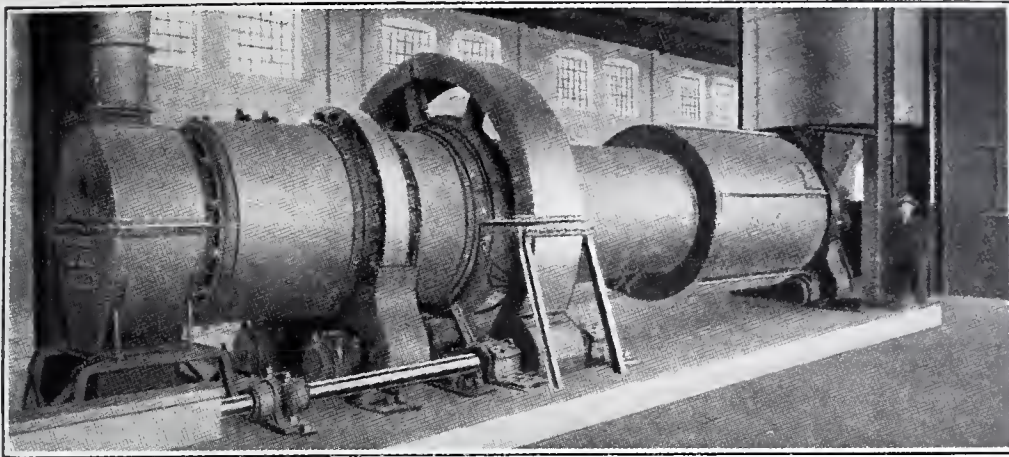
POLYSIUS COMBINATION SOLO BALL AND TUBE MILL.
